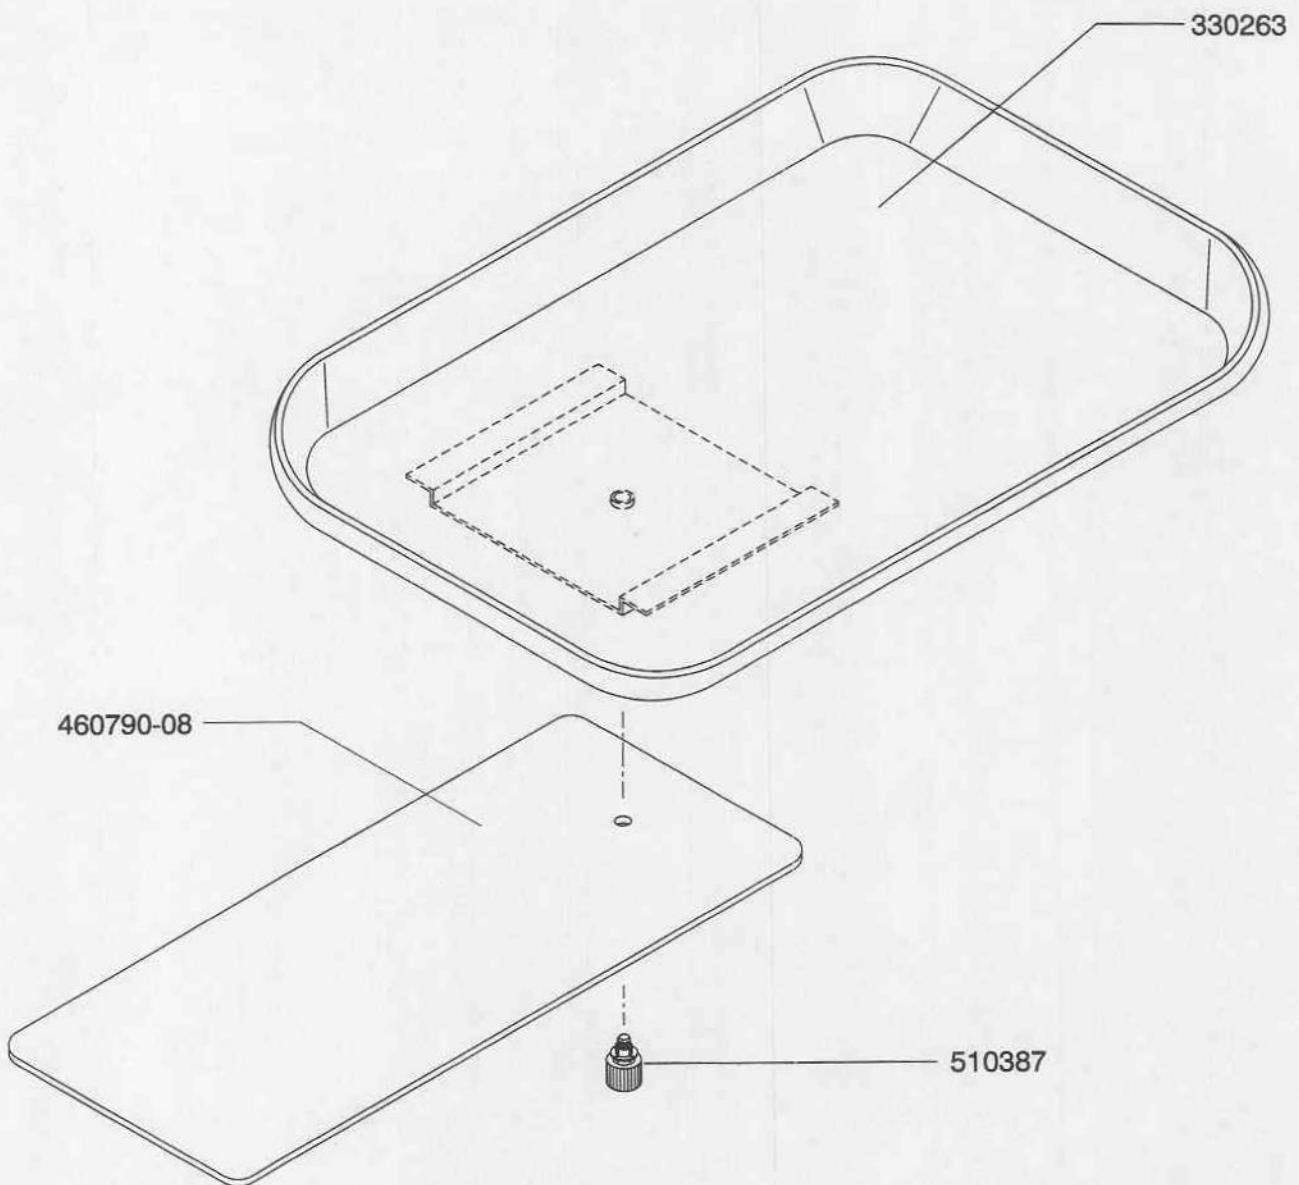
A - ILLUSTRATED PARTS LIST, 330256 SWIVEL TRAY ASSEMBLY
